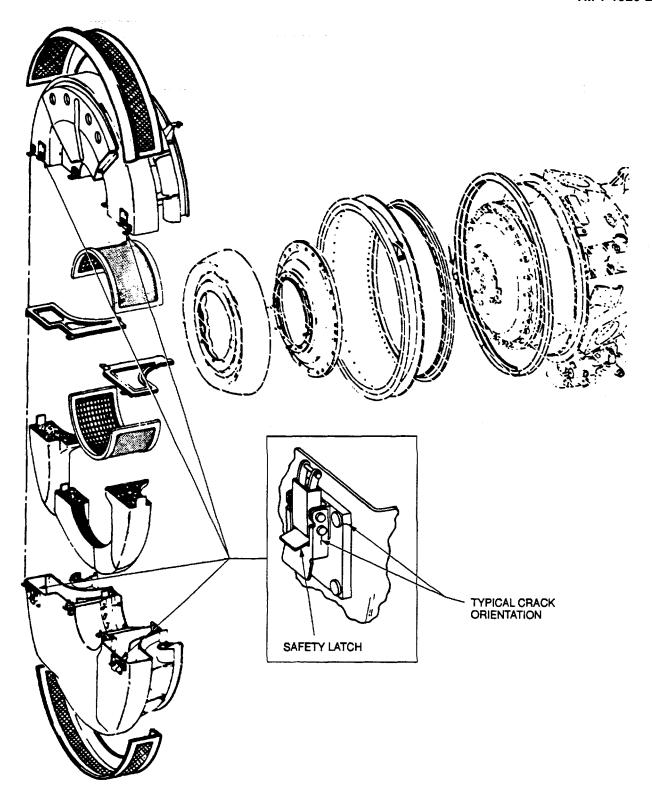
Inlet Screen Latch Assembly Self-Purging - Air Induction System
